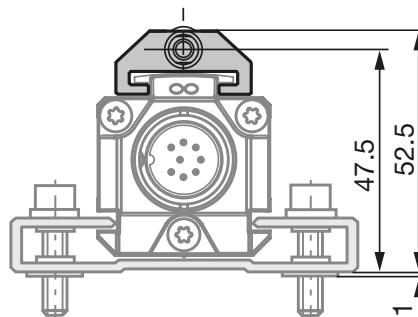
Dimensions and distances with BTL5-T-2814-1S magnet
